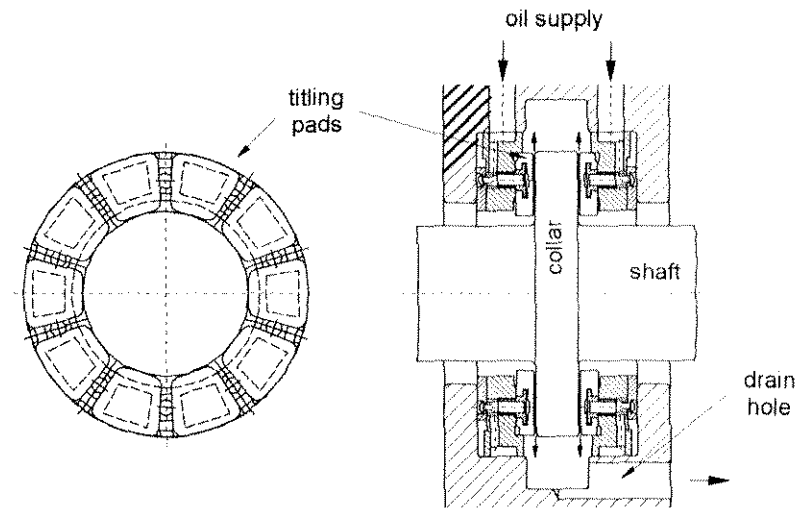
b Tilting pad thrust bearing - directed lubrication
